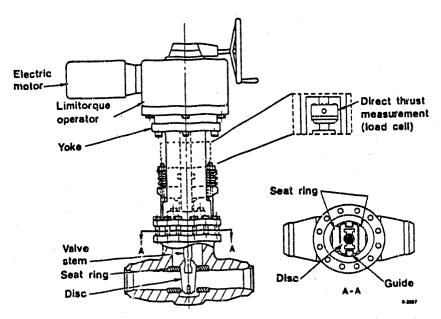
The test program used two motor-operated gate valves similar to the typical valve shown here; load cells were installed in the valve stem, as shown.
